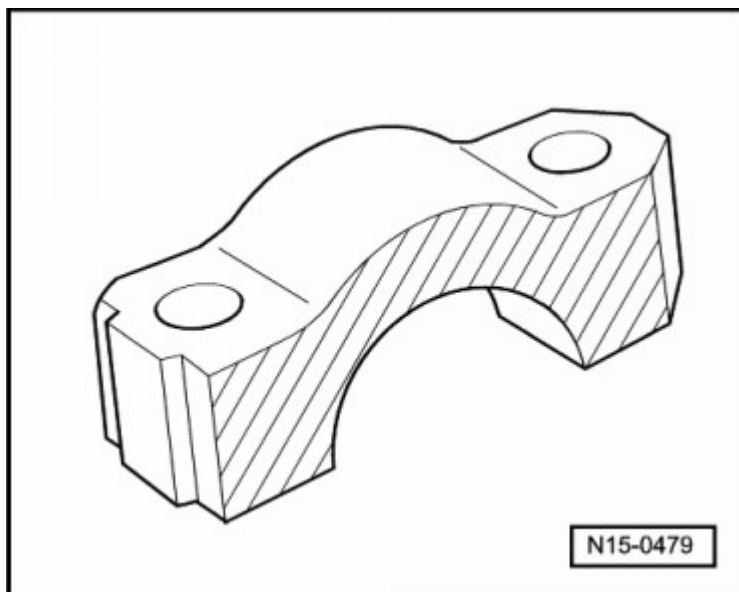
Coating Bearing Caps 7 And 8 Contact Surface With Adhesive Lubricating Paste
